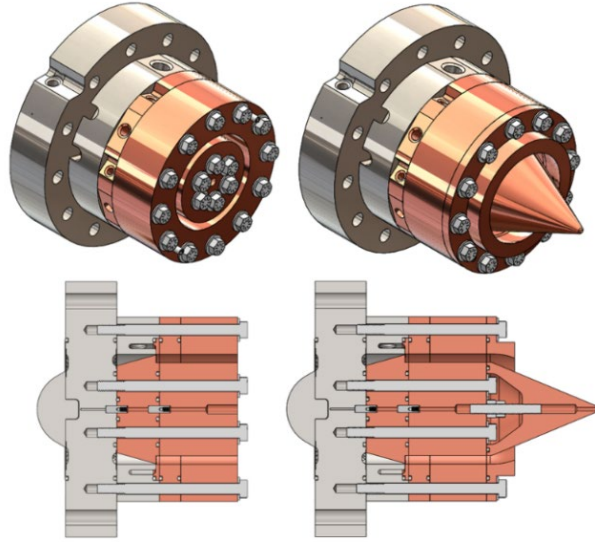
Isometric and cross-sectional views of nozzle-less (left) and IE-aerospike (right) geometries for Purdue rocket RDE V1.3 test campaign. [8]
